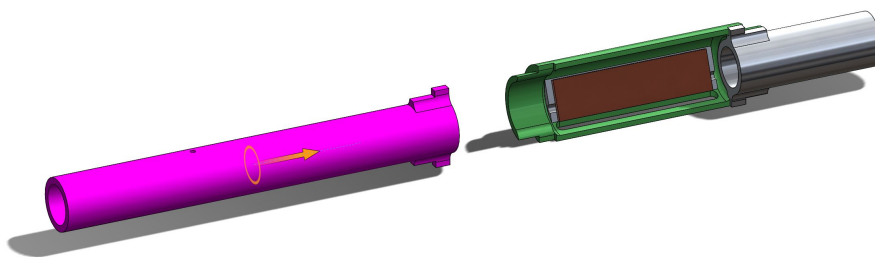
Place the main shafts (item 6 and 9) on each side of the flex shaft sub assembly, with the flange towards the flex.
